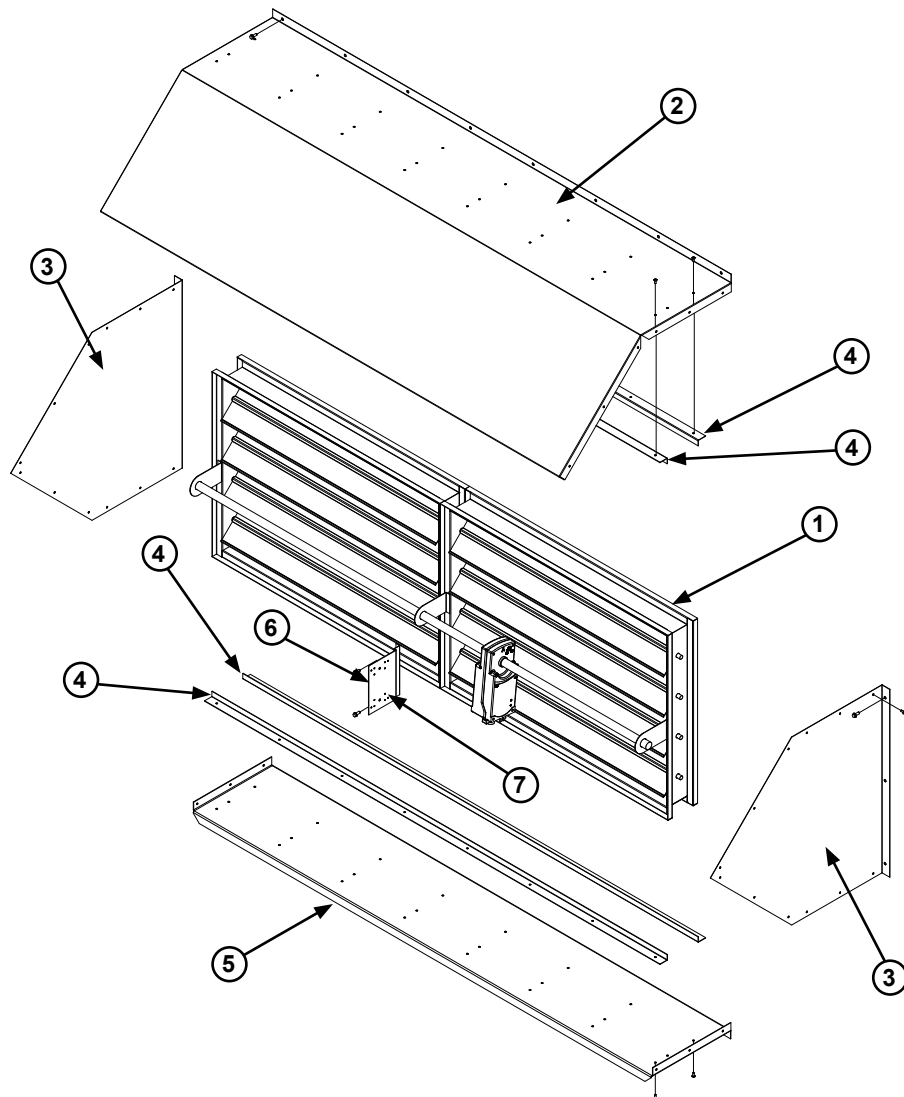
EXHAUST HOOD AND EXHAUST DAMPER
